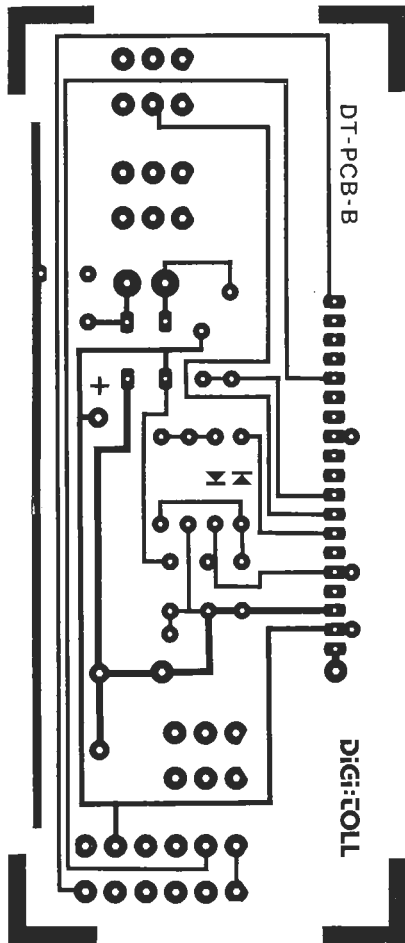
FOIL PATTERN for rear (solder side) of back board is shown full-size. Switches are on this board.
